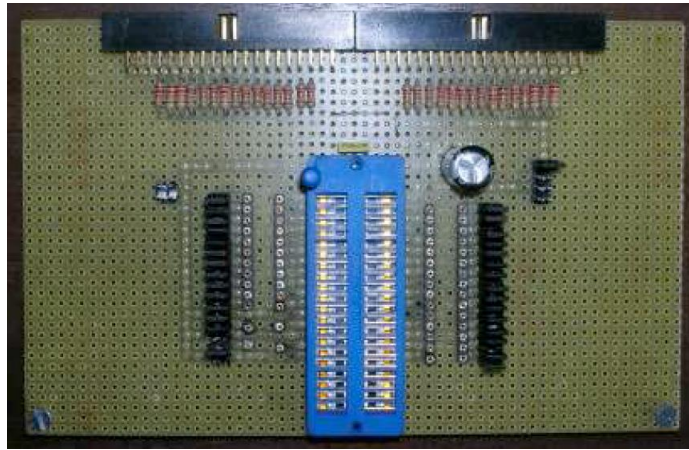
TC24 (DUT) inserted in socket on custom PCB.
